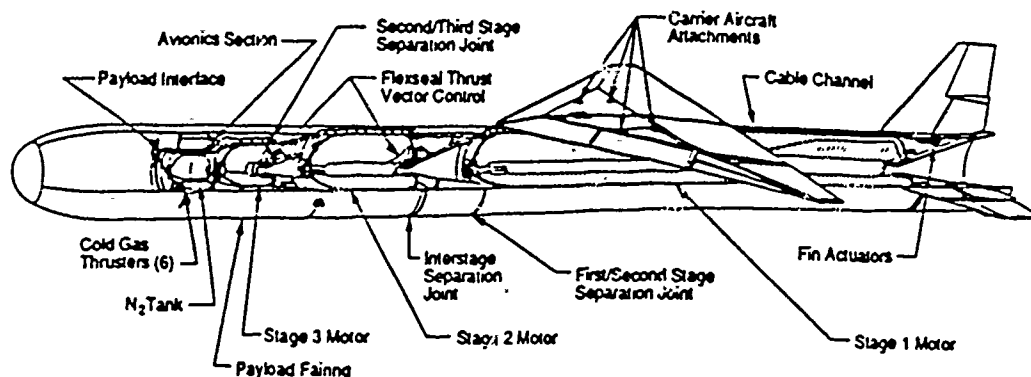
Pegasus Cutaway Drawing (reproduced from (5:5.33))
